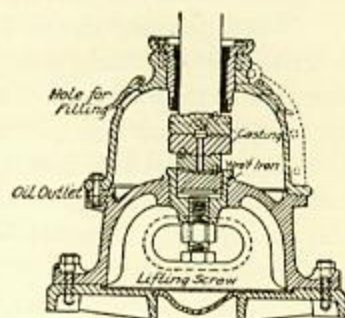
Submerged Oil Step-bearing at Lower End of Vertical Shaft.
